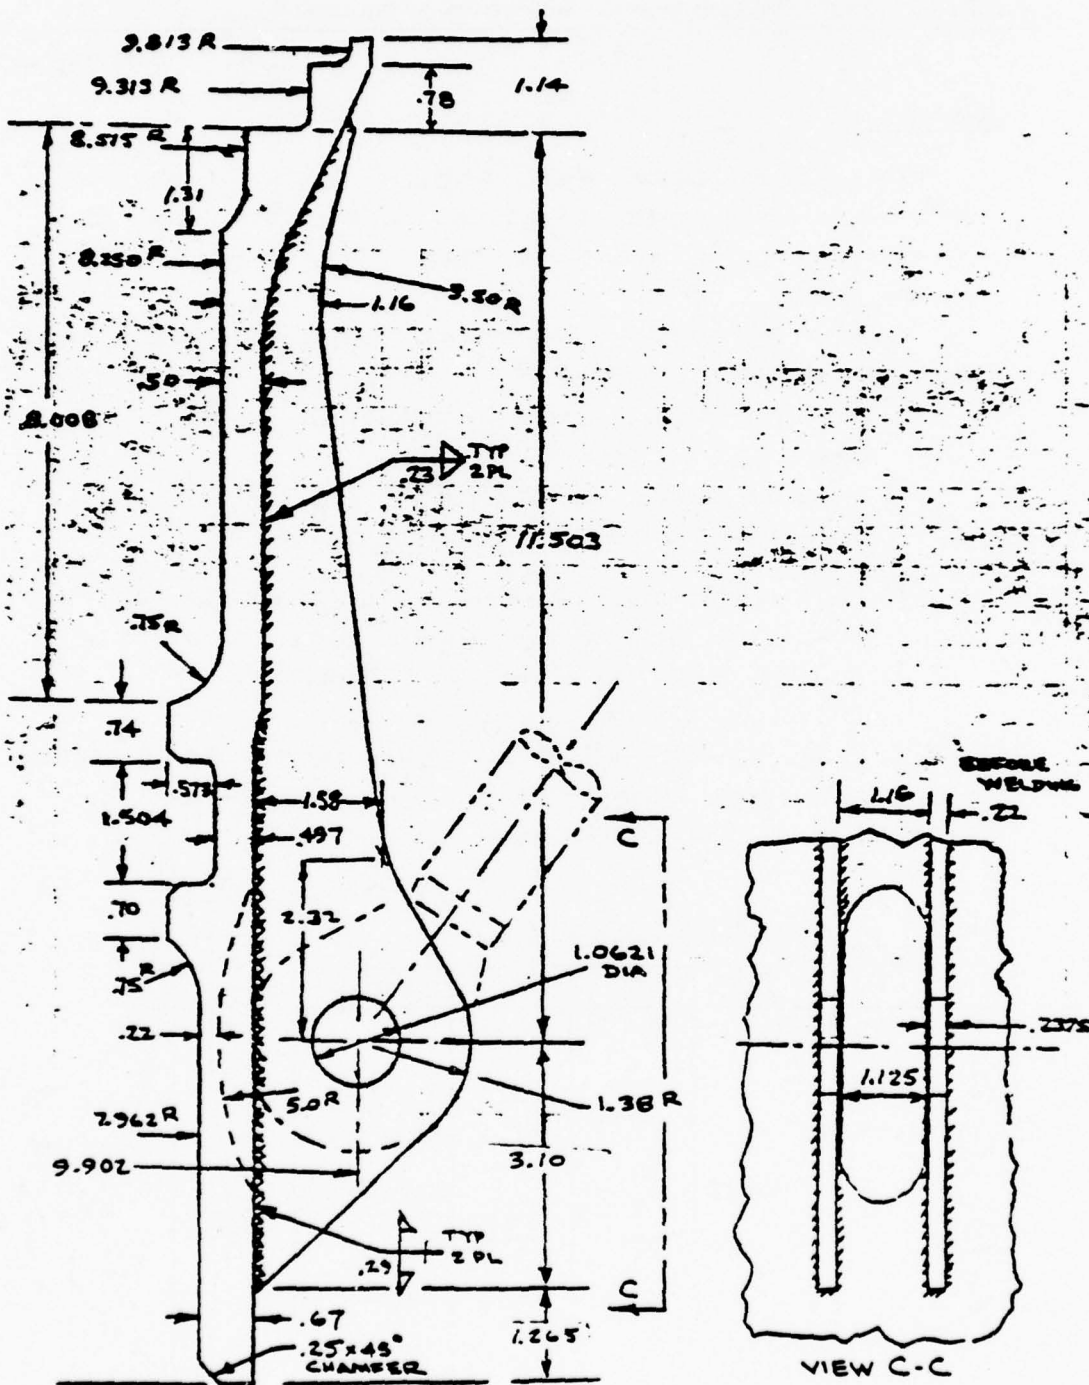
FIGURE INBOARD SHEAR FITTING - GEOMETRY
